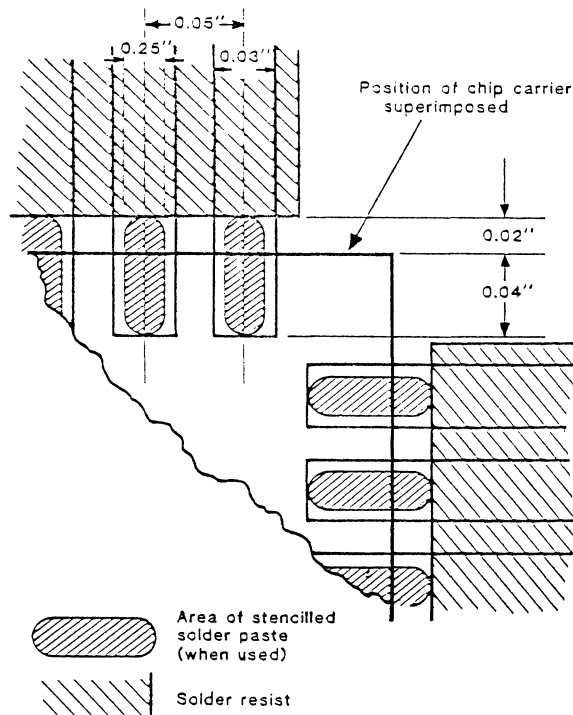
Solder Pad and Solder Resistor Dimensions showing one corner of foot print.
